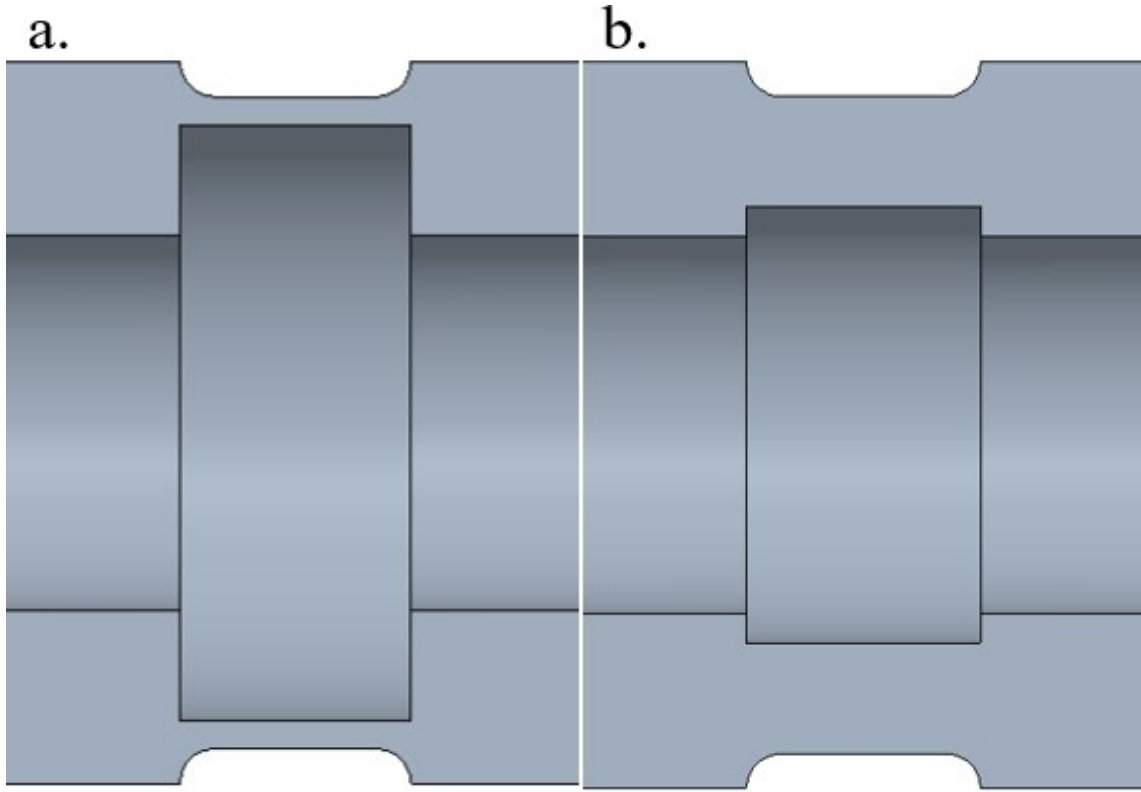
Cross-sectional view of roll cage gauge location. (a) Original roll cage gauge location. (b) Updated roll cage gauge location.
